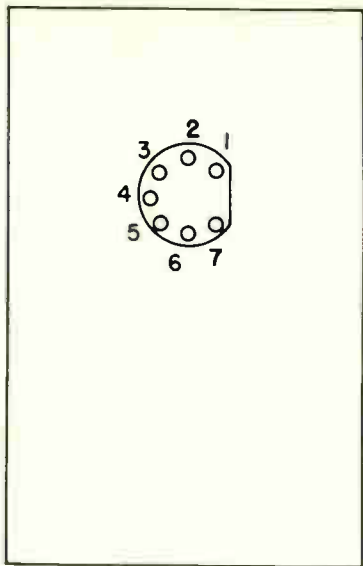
Identifying the tube socket pins on the etched circuit board.
